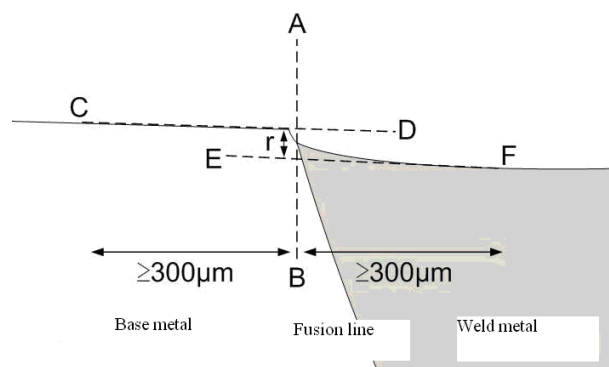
(1) Measurement for depth of weld corrosion
